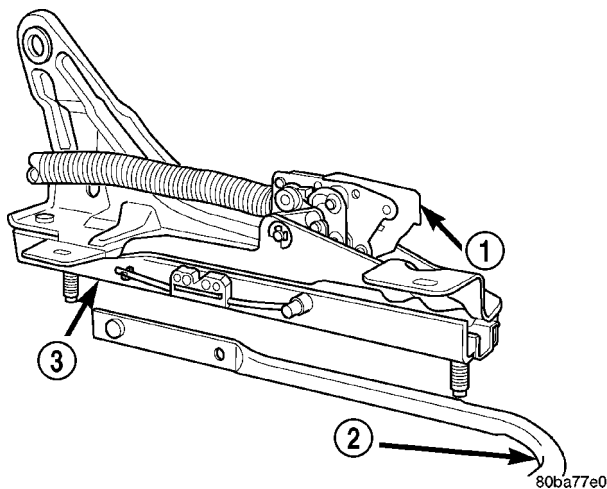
FRONT SEAT TRACK ADJUSTER HANDLE
